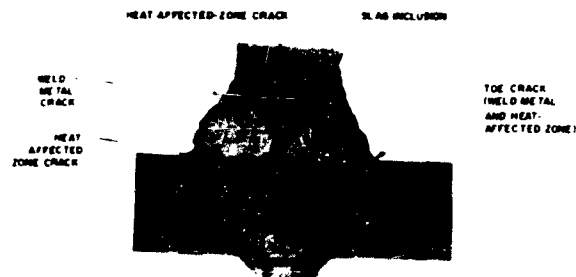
Photomacrograph of the auxiliary-ballast-tank tee-joint sample showing a slag inclusion, a weld-metal crack and several heat-affected zone cracks. Etched in Ammonium Persulfate. XI.
